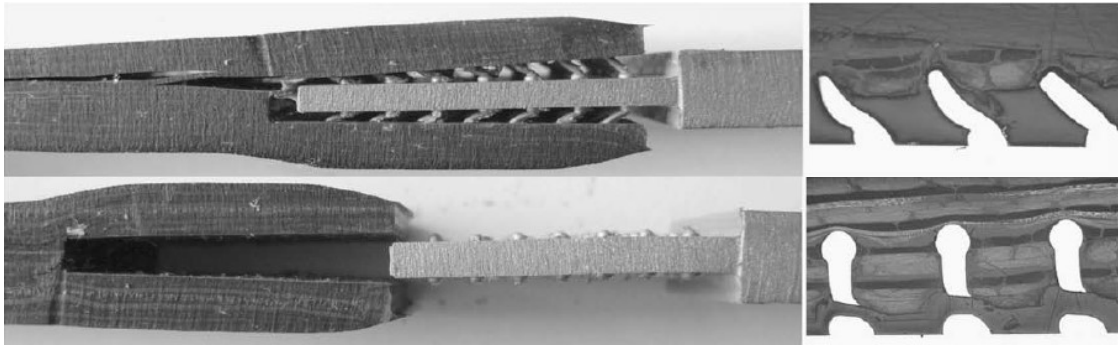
Failure modes for CMT-pinned double lap joints [54]
